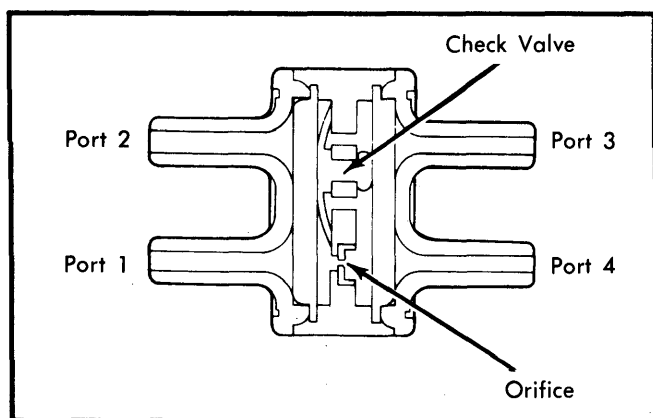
Vacuum Spark Control Delay Valve (4 Cylinder Engines)
